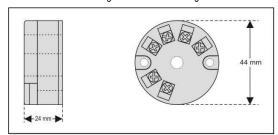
Transmitter dimensions TxlsoPack-HART
